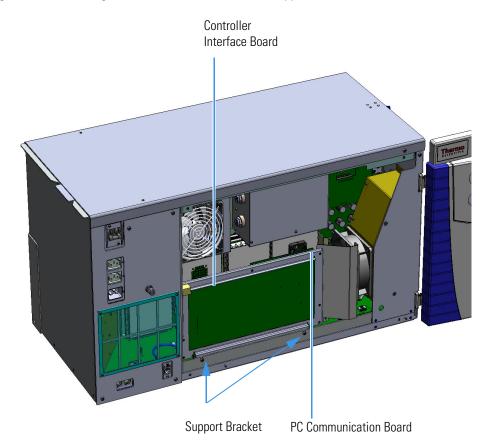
Locating the Ethernet Cable Connector on the PC Communication Board
